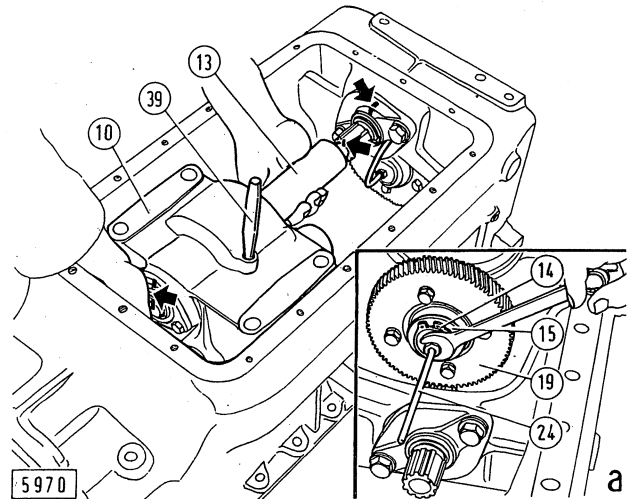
Assembling the weights housing box (10) with sleeve coupling (13) in oil sump removed from engine.
